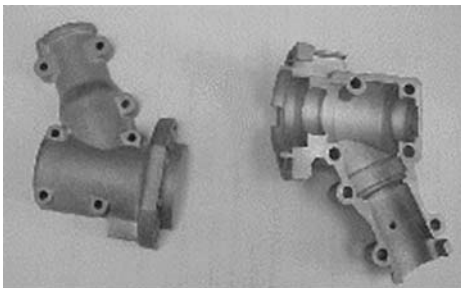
Die-cast magnesium gear case for a string trimmer (photo courtesy of Mag-tec Casting)
